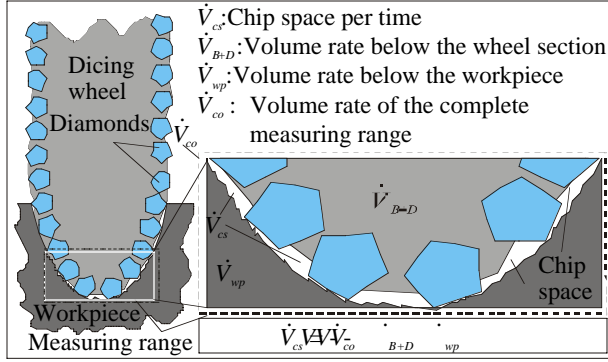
Cross section of a dicing wheel cutting a workpiece
